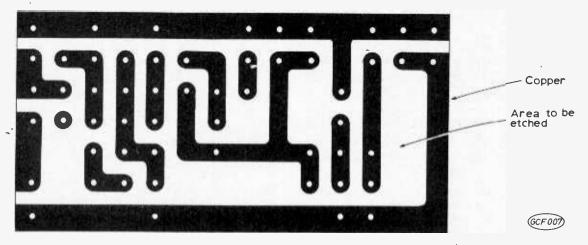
When the layout is finalised it must be reversed on to the board as shown here, complete with the holes required, drilled after etching.
